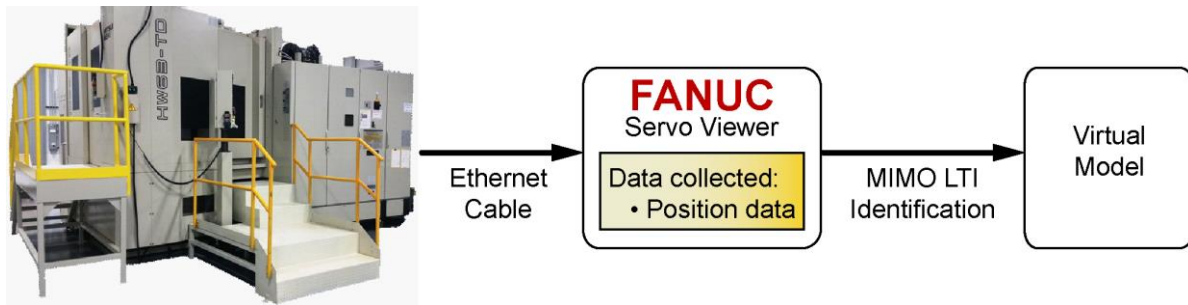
Experiment identification process for MIMO LTI model (representative picture of machine-tool obtained from [57])
